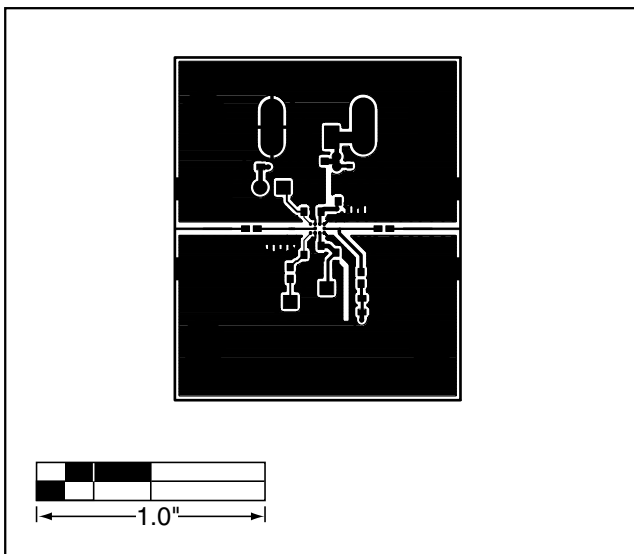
MAX2840 EV Kit PC Board Layout—Primary Component Side
